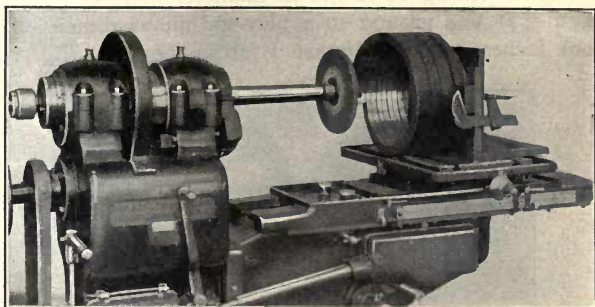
Grinding the hole in a coil spring on a Heald cylinder grinding machine.
